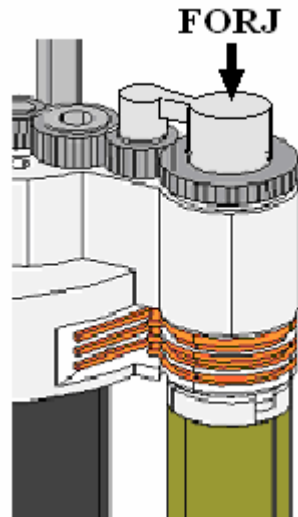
The MASA spindle principle, with a drill pipe connected to the spindle. The FORJ is seen above the spindle’s bevel gear (Images: MA).
